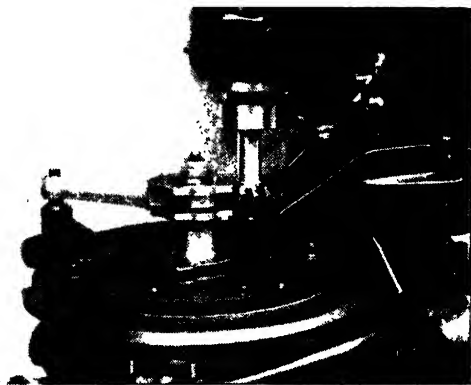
Form Milling on a Vertical Spindle Machine using the Circular Table.
